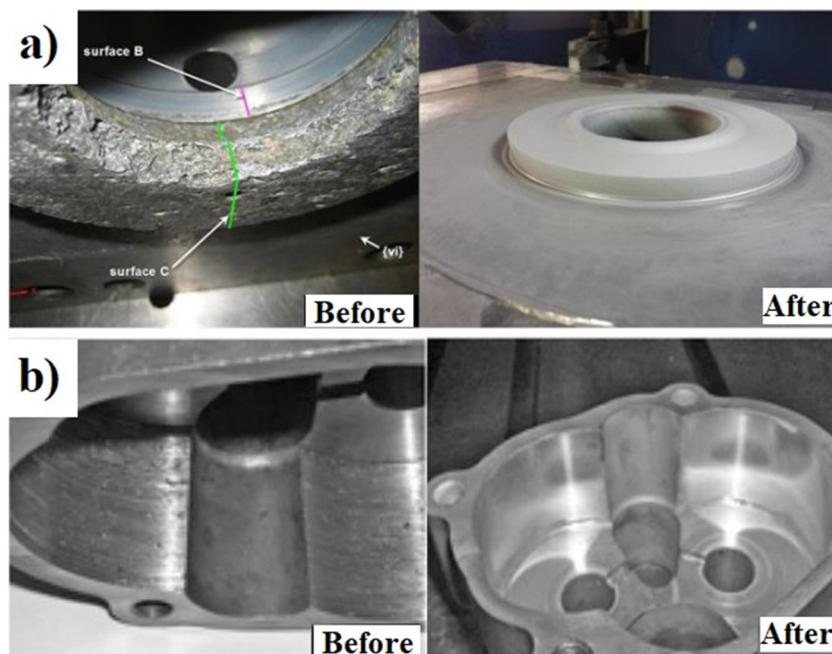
Comparing the deteriorated and restored parts by CSAM: (a) inner bore surface of a navy valve actuator and (b) oil pump housing of Caterpillar engine [72].
